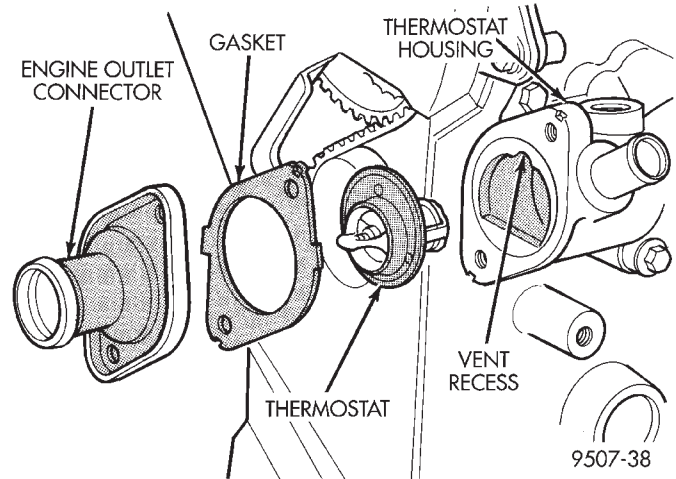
Thermostat, Housing, and Outlet Connector —2.4L Engine
